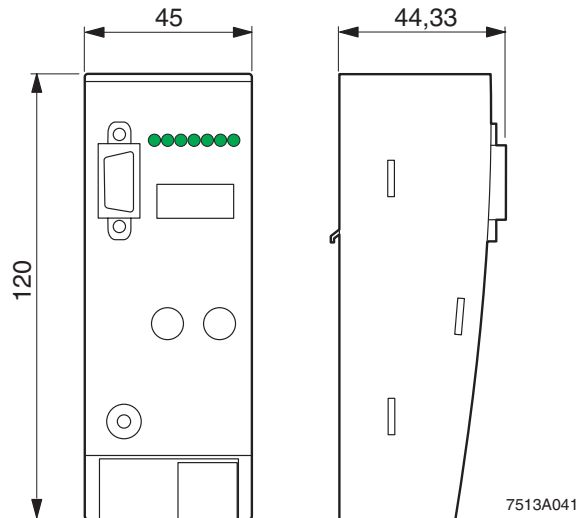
Housing dimensions of the FLX ASI MA PB SF master in mm
